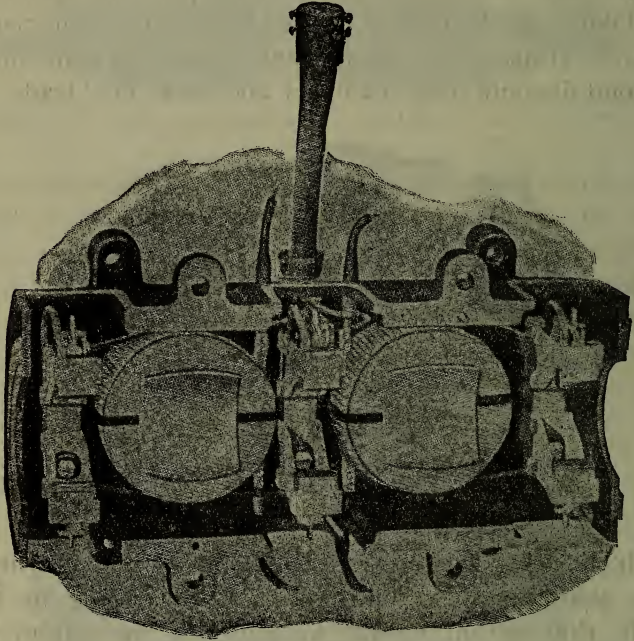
INTERIOR VIEW OF BUCKER SHOWING CONSTRUCTION OF UPPER FRAME, BRUSH HOLDERS AND WIRING.
